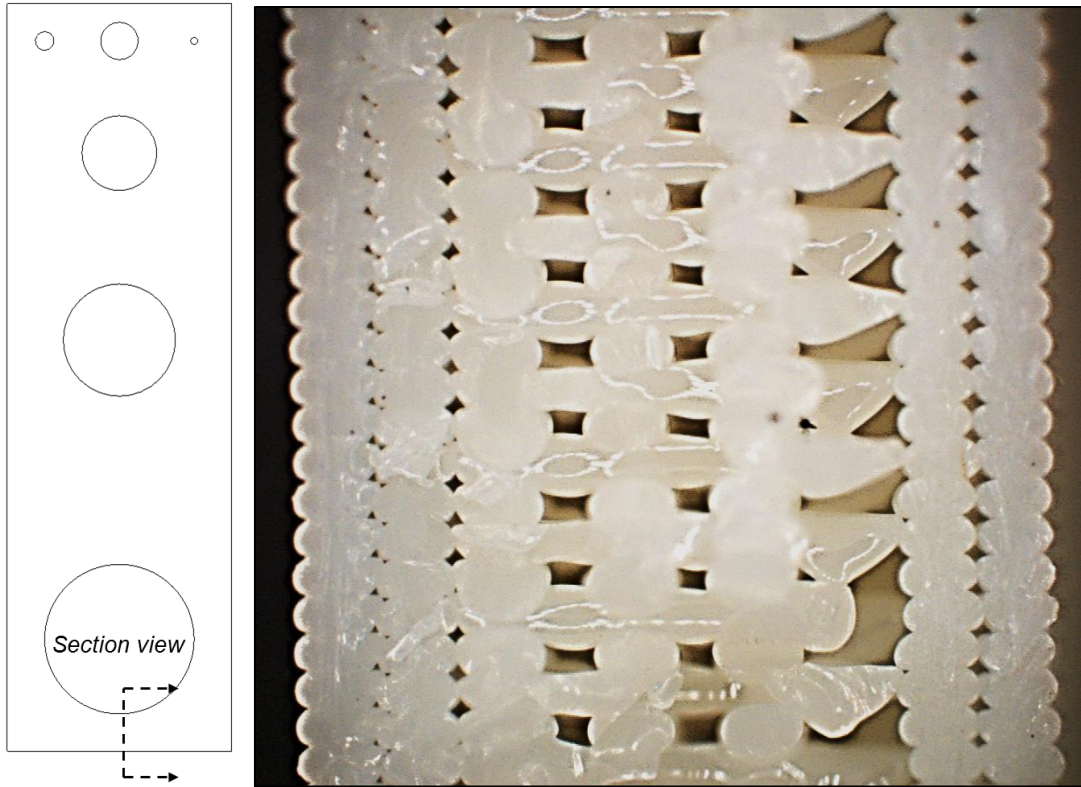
Fracture surface of shown cross-sectional area showing incomplete infill road geometry
